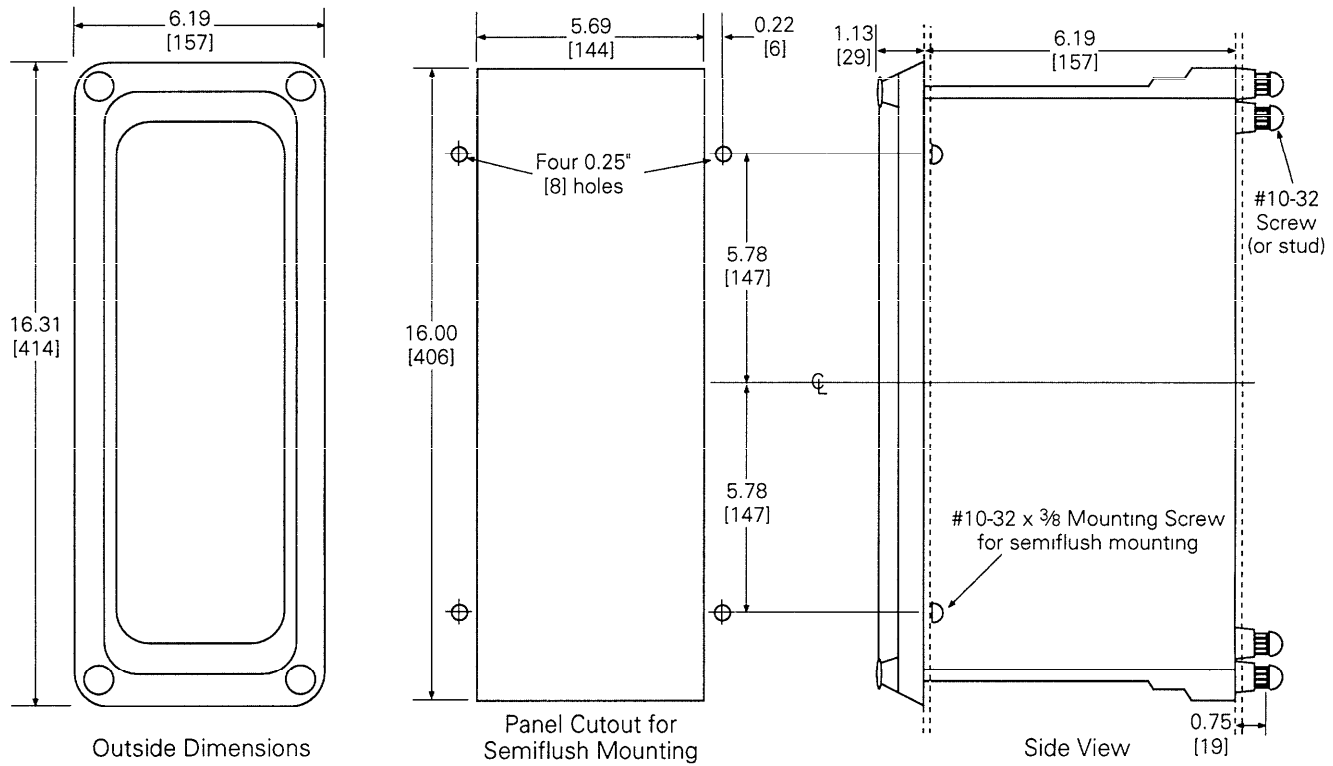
Case and mounting dimensions in inches [mm] for the DMP in a drawout case.
